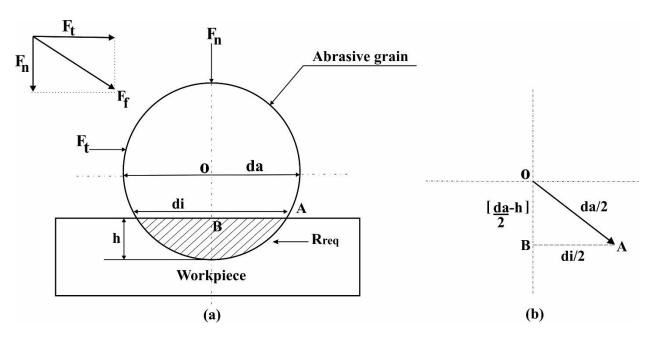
A schematic of (a) the meeting of an abrasive grain with the workpiece and (b) the OAB triangle induced by abrasive penetration into the workpiece.
